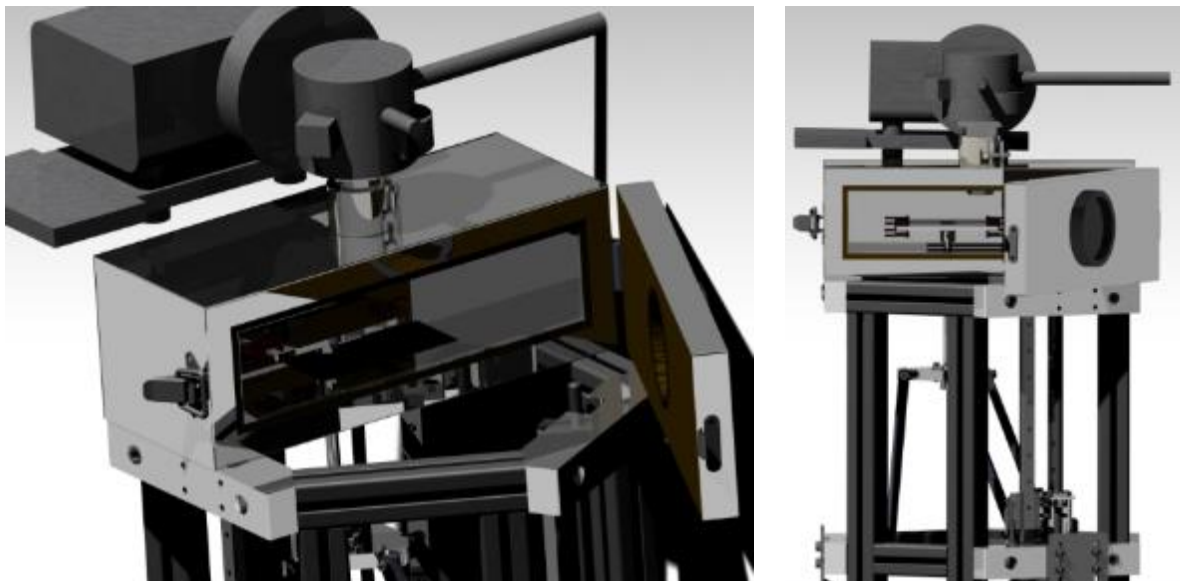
Final assembly of the 3D stage and heating furnace compatible to the extruder in order to print PEEK
